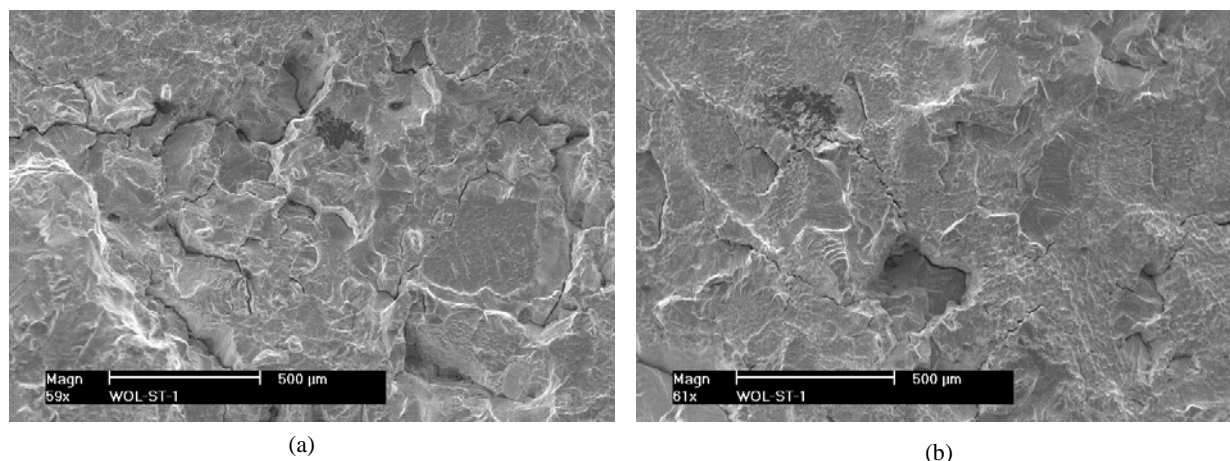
Fracture surface of specimen WOL-ST-1 at (a) location 4, and (b) location 5 in Fig. 14. Crack advance is from bottom to top.
